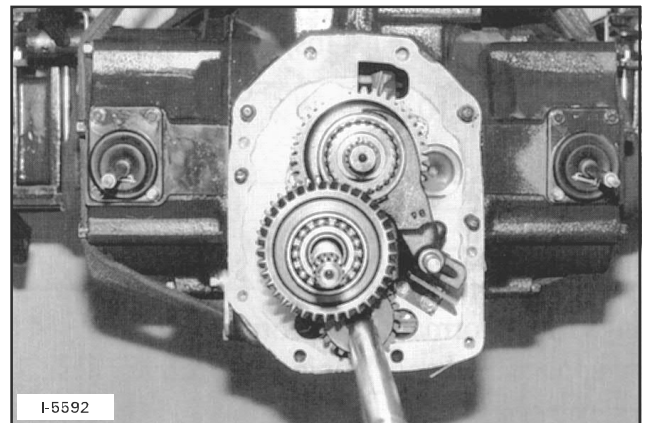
A-49: Roll pins should be wired in place as shown, 1.
